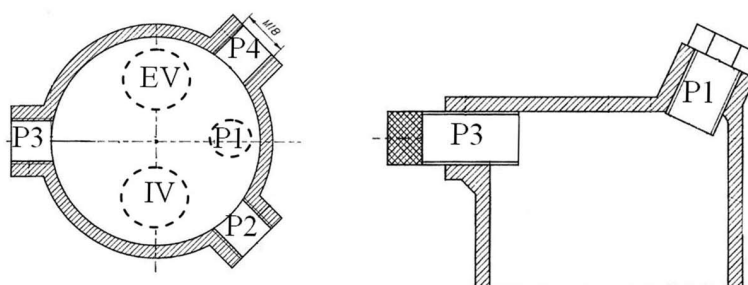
Cross section of the CFR engine, P1: spark plug position, P2-P4: sensor positions, IV: intake valve, EV: exhaust valve.
